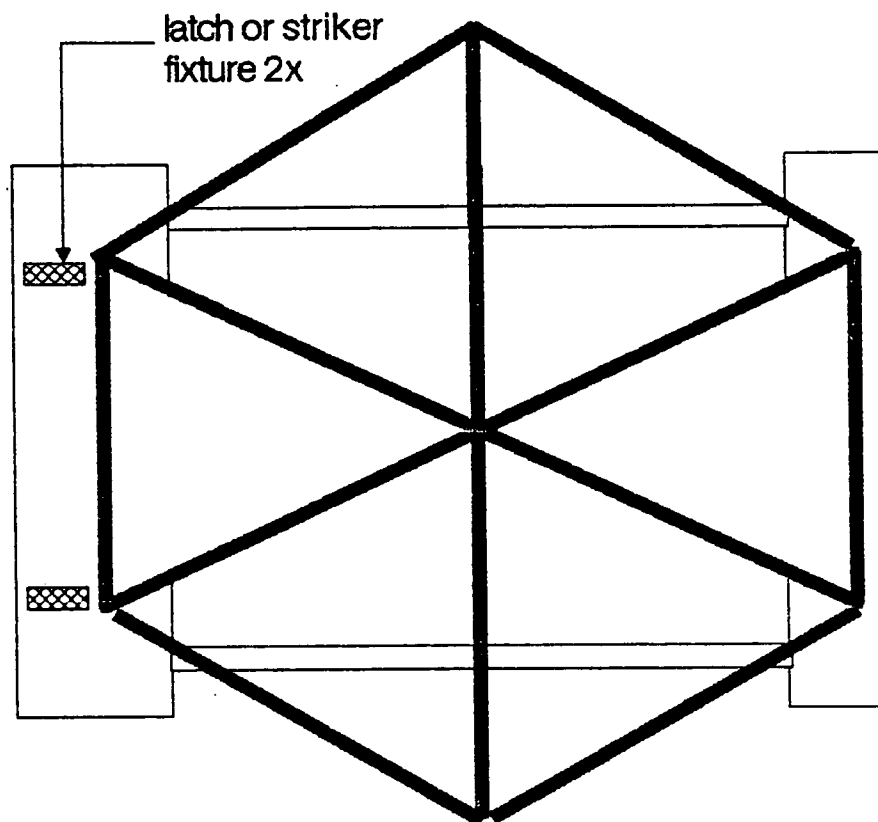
Concept For Latch Alignment Table Presented In The Harris Critical Design Review
